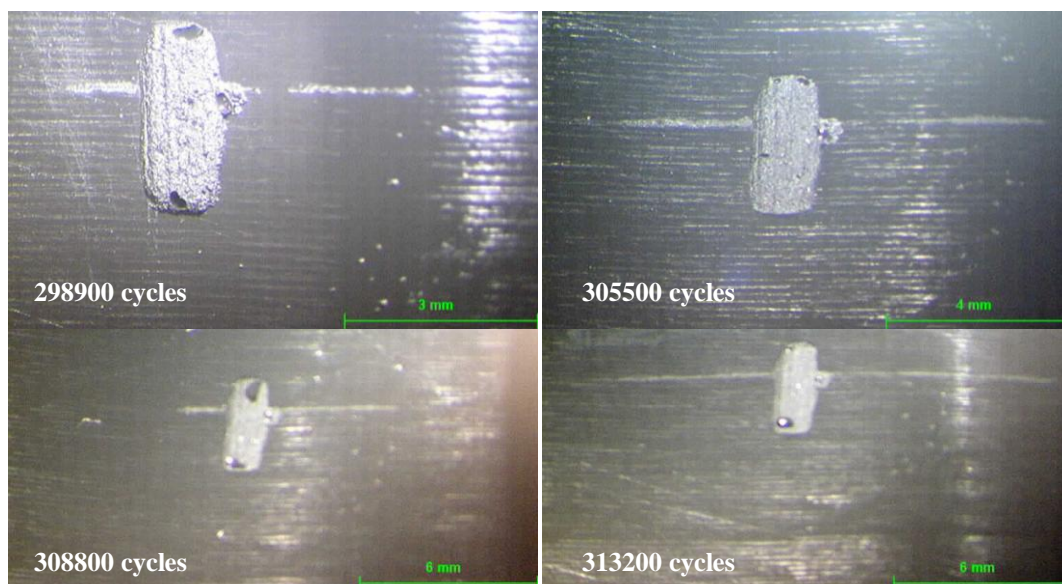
Larger scale fatigue specimen 2 - Fatigue crack propagation
